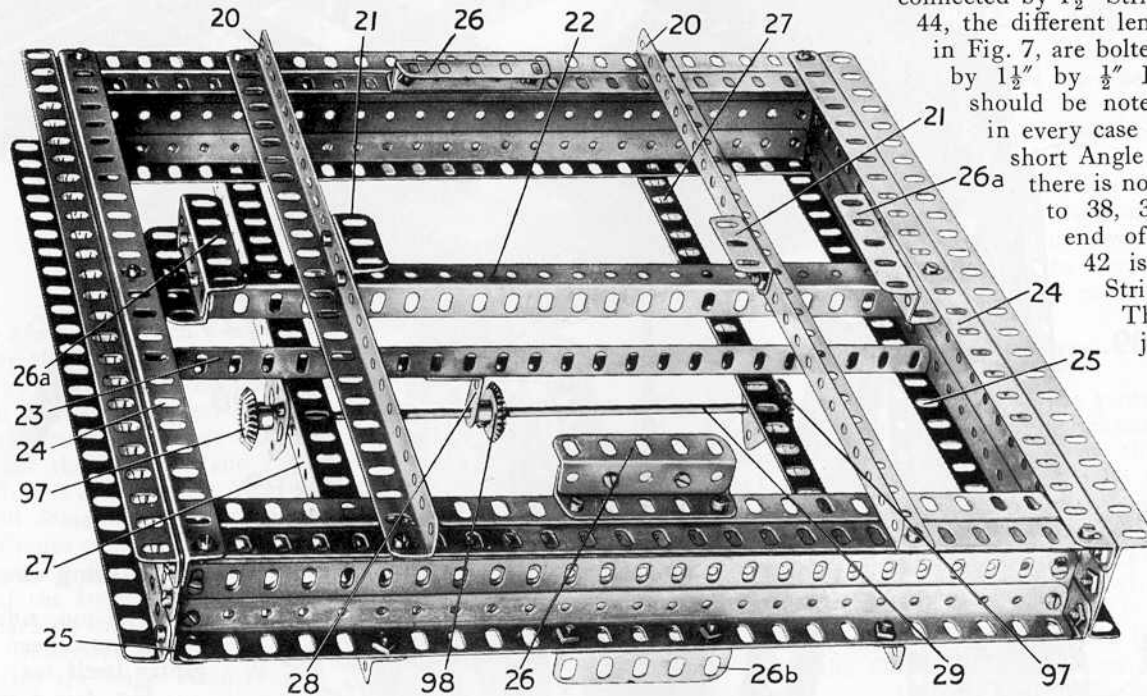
Top of Gantry, showing short Girders (26, 26a) on which roller race is mounted
